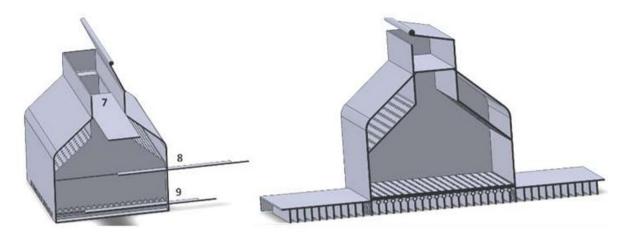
Three-dimensional space model of a solid fuel furnace with back draft.
